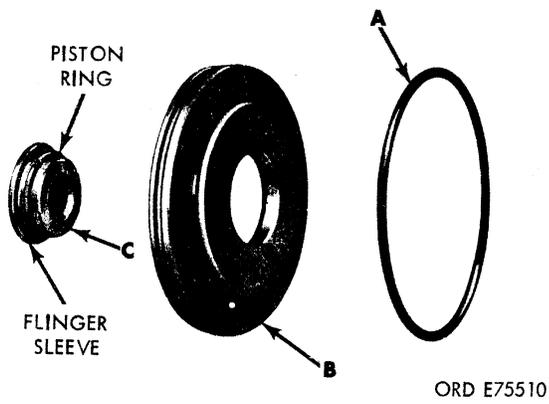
Removing compressor insert O-Ring and flinger sleeve.
